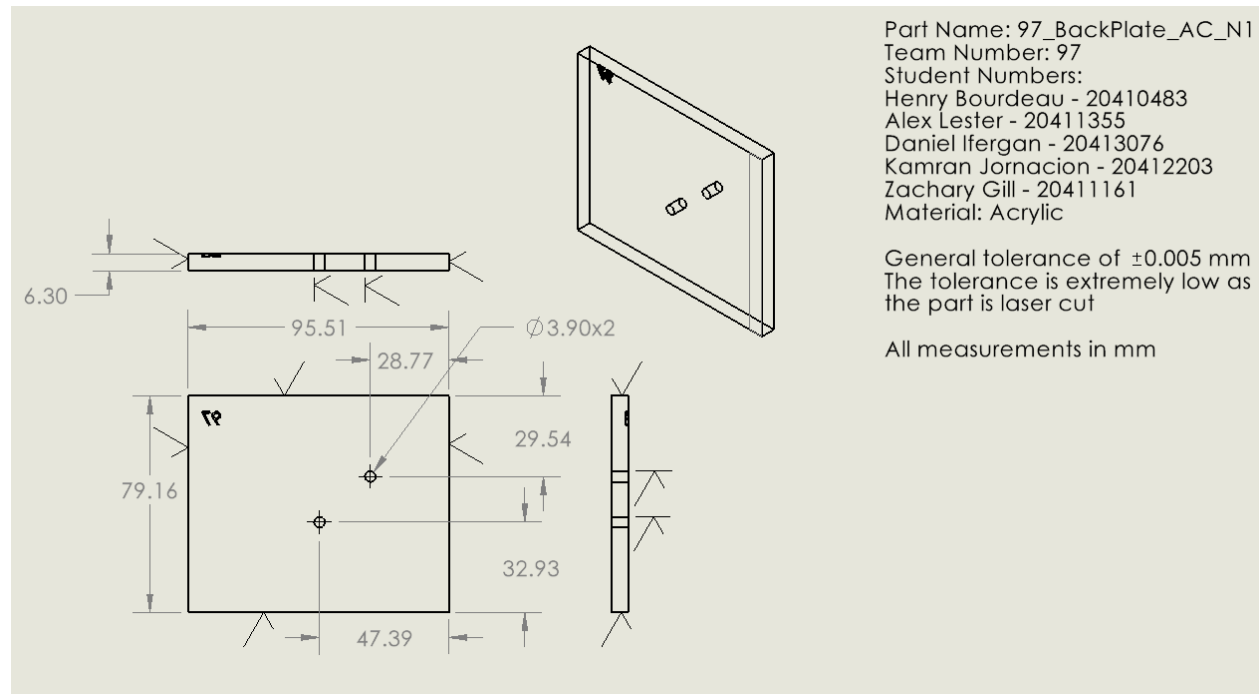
Working drawing for 97\_BackPlate\_AC\_N1
